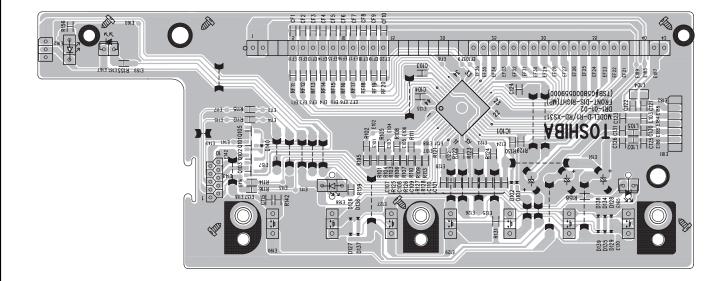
EU03A Front (R) PC Board (Bottom side)
